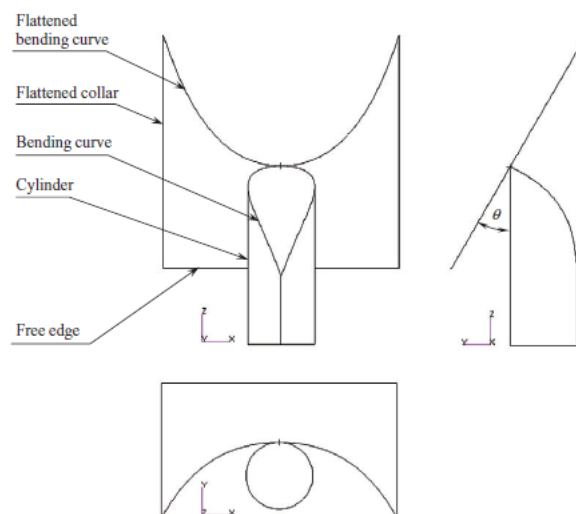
Traditional method for manufacturing forming shoulders. (Desoki, Morimura and Hagiwara 2010, p. 36)
